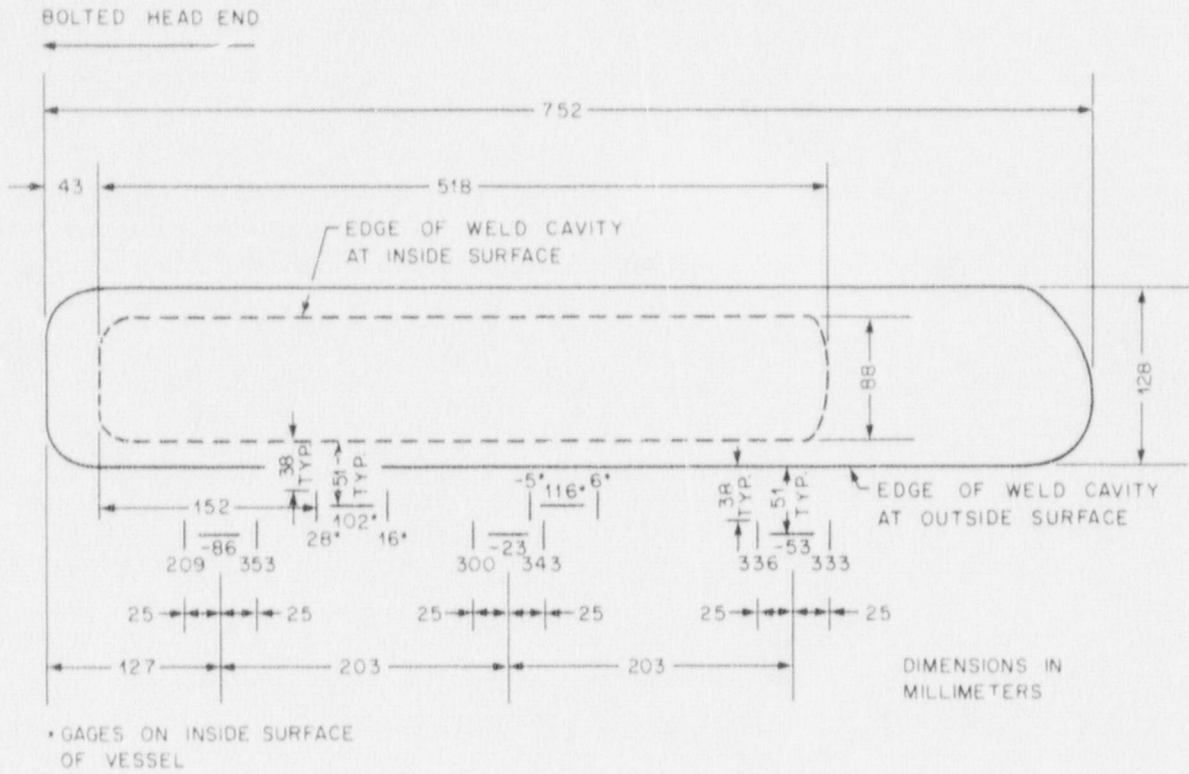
V-7B repair weld residual stresses (MPa) determined from weldable strain gage measurements.
